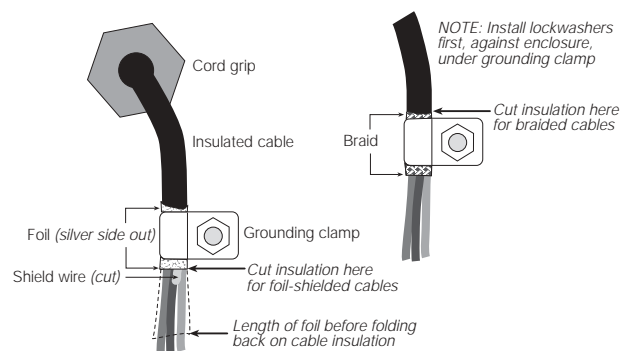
Grounding Clamp Attachment for Foil-Shielded and Braided Cabling
